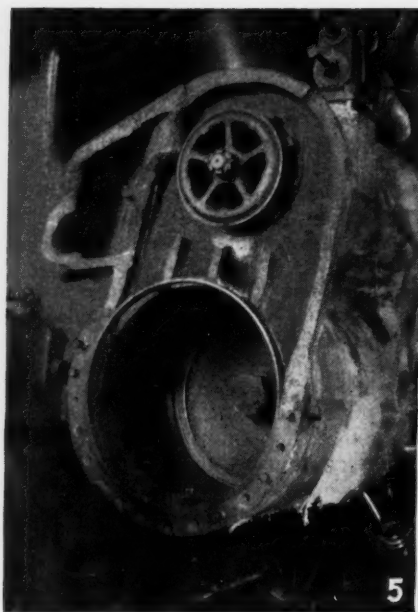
A badly-broken cylinder. Fig. 6—The furnace is completely closed after the welding job is completed.
